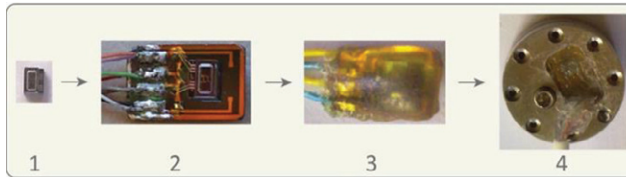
Osmotic glucose sensor. 1) MEMS pressure; 2) after wire bonding; 3) Sealing with epoxy glue; 4) sensor inside a container with a laser
